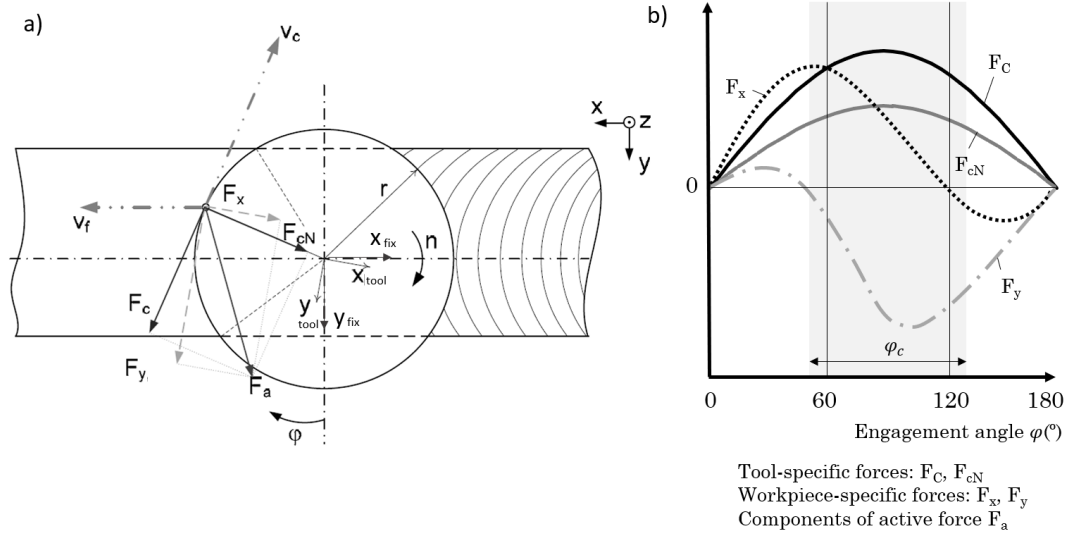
Tool-workpiece engagement parameters in plain face milling, adapted from [9].
